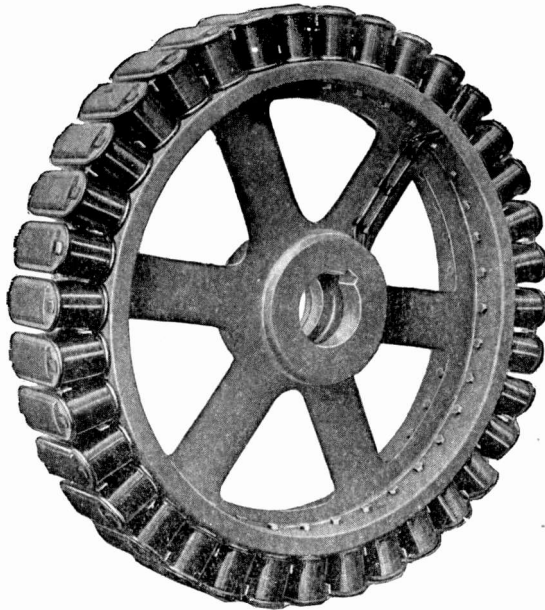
Rotor Construction with Laminated Pole Pieces Bolted to Cast-Iron or Steel Ring
